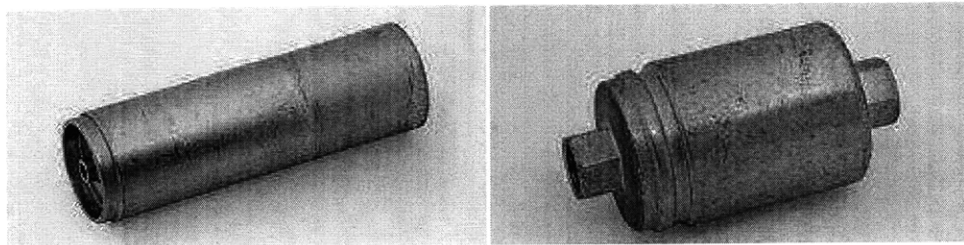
Photograph of two fuel filters electromagnetically welded at PULSAR [54].
